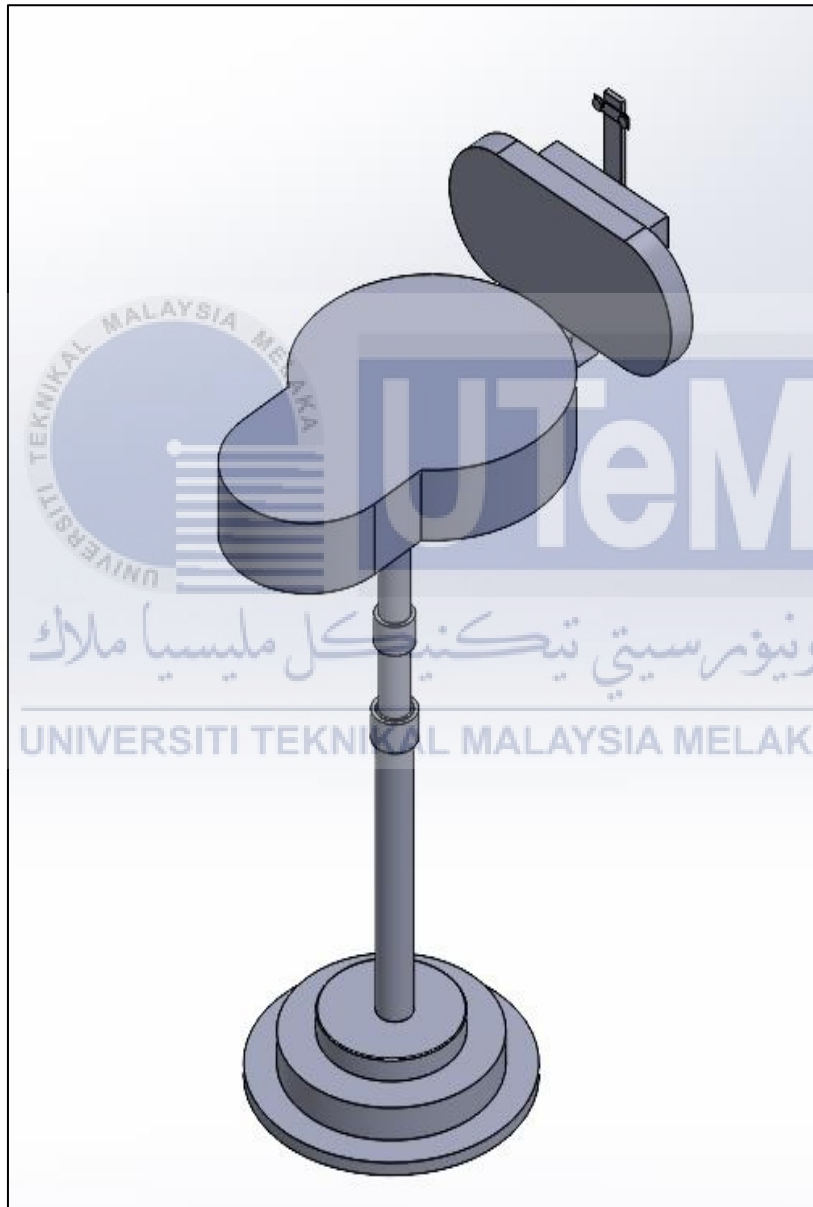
Design 3 of Smart Modular Lower Body Support
